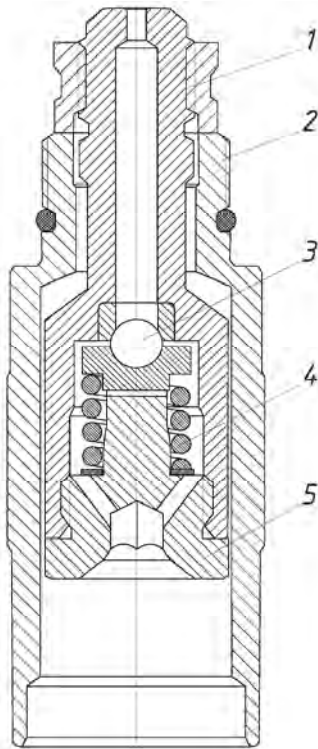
Check valve of the fuel drain system: 1 – valve housing; 2 – outer housing; 3 – ball valve; 4 – pressure spring; 5 – screw plug (adapted from [60])
